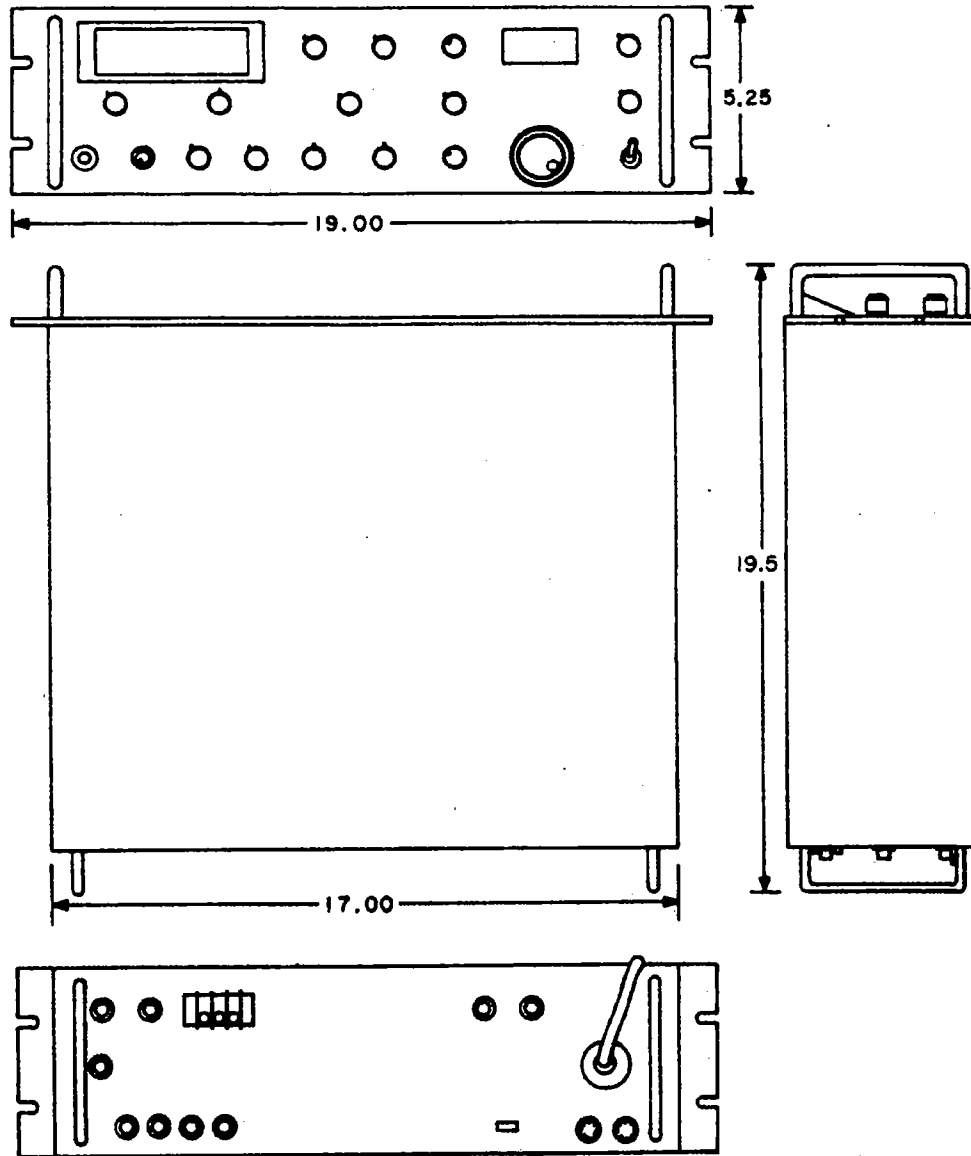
Type DMS-105A Demodulator, Critical Dimensions
